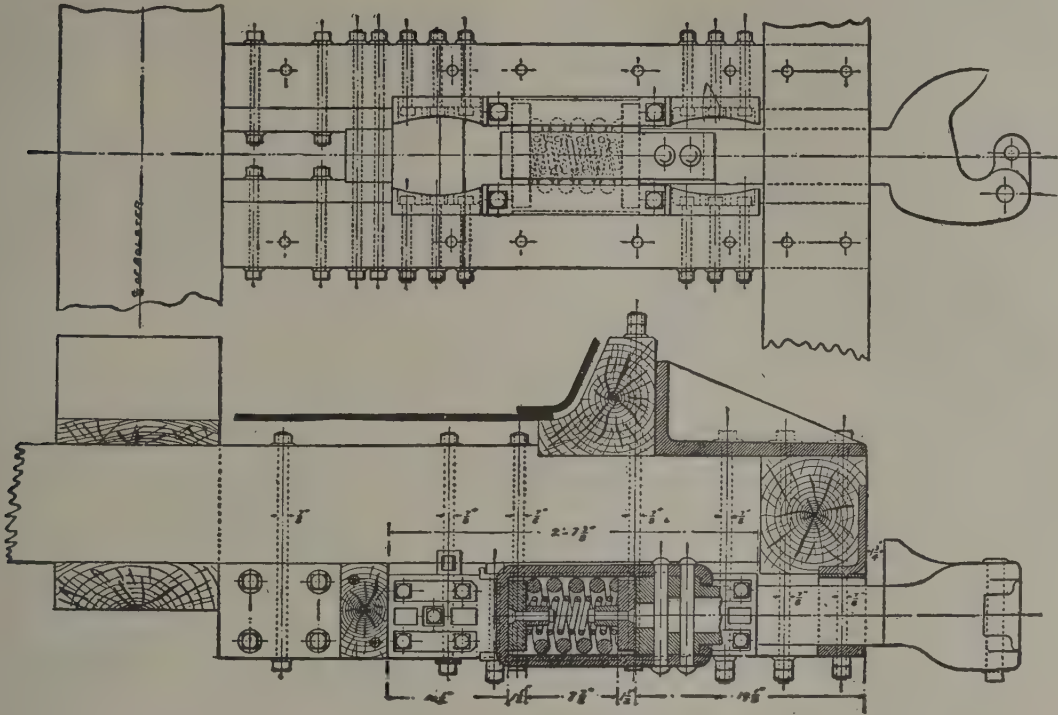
MINIMUM REQUIREMENTS, DRAFT GEAR AND ATTACHMENTS, CLASS I-TANK CAR WITH WOODEN UNDERFRAME.
